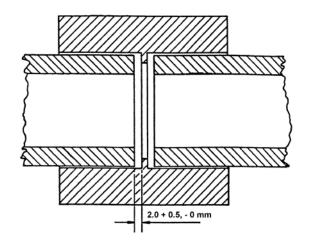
Socket Weld Configuration Prior to Welding.
